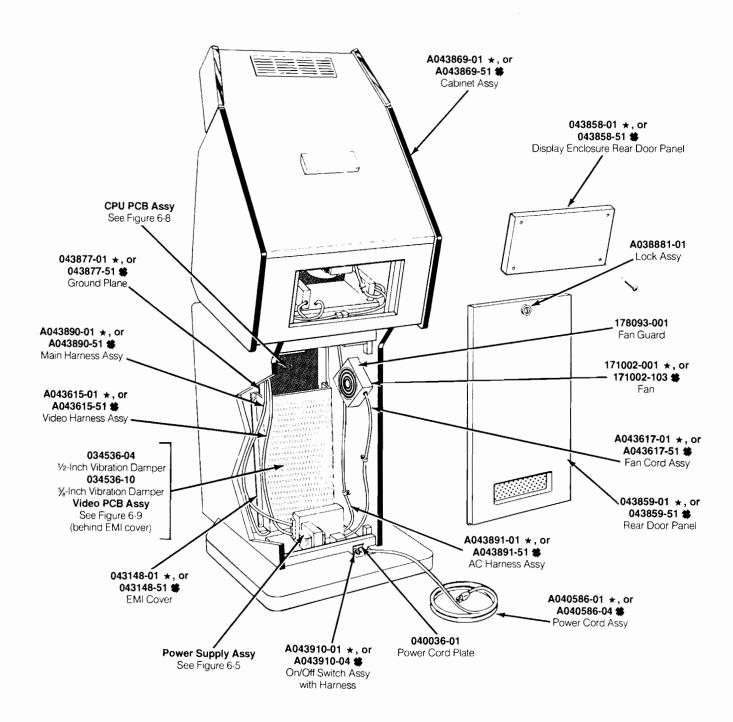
Cabinet-Mounted Assemblies, Continued
